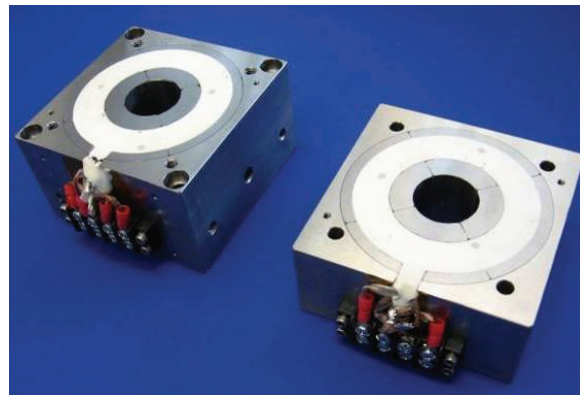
Complete front (left) and rear (right) magnetic bearing assemblies.
